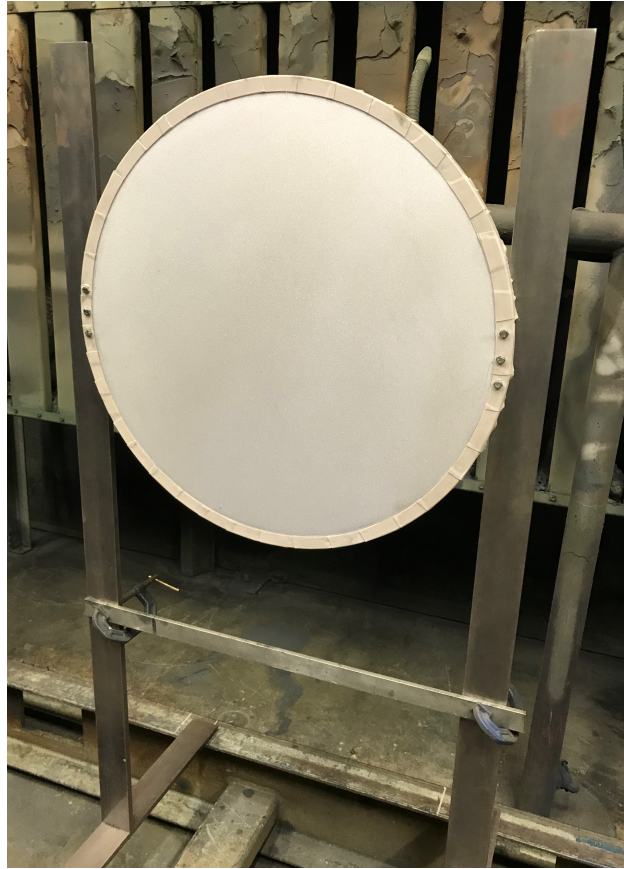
POLARBEAR-2b lens spray coated on a fabrication fixture.
